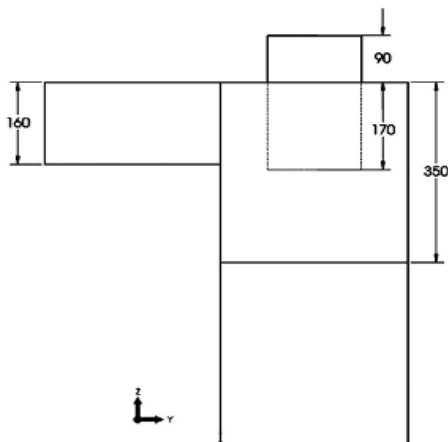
Geometry and dimensions (in mm) of the square hydrocyclone [5].
